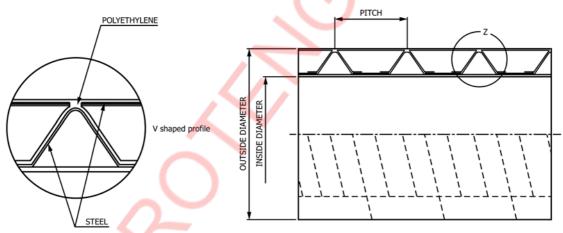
Triple-Wall Steel Reinforced Corrugated Polyethylene Pipe - Type IIA
